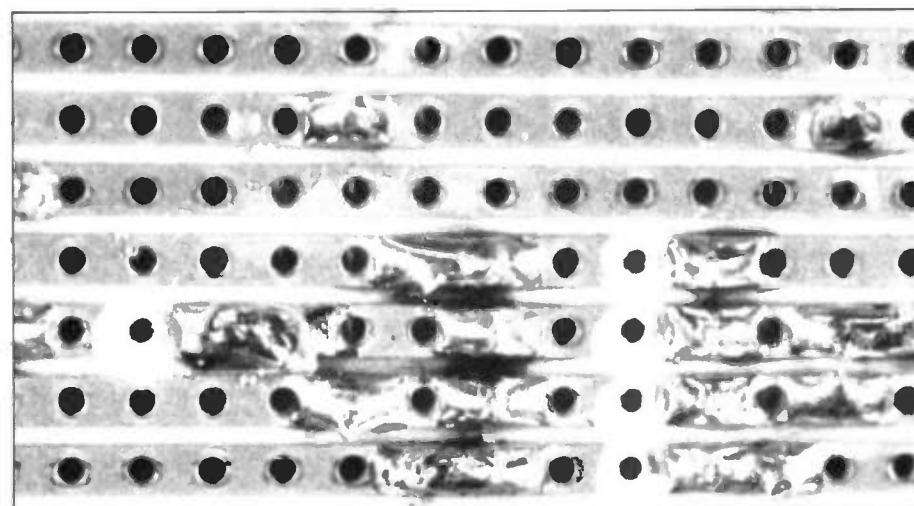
Properly made solder joints. Note the smooth and shiny appearance.
